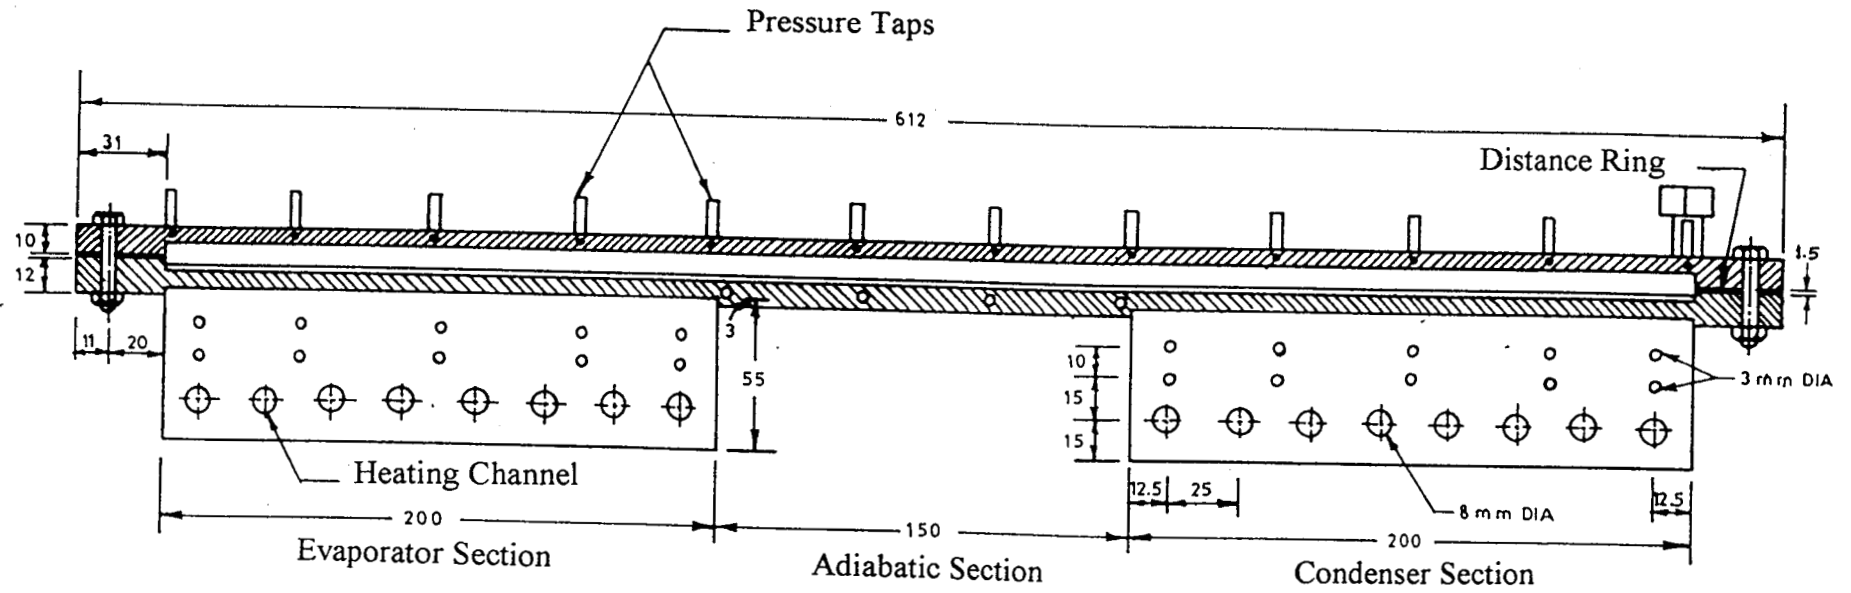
Stainless Steel - Water Heat Pipe - Longitudinal Section
